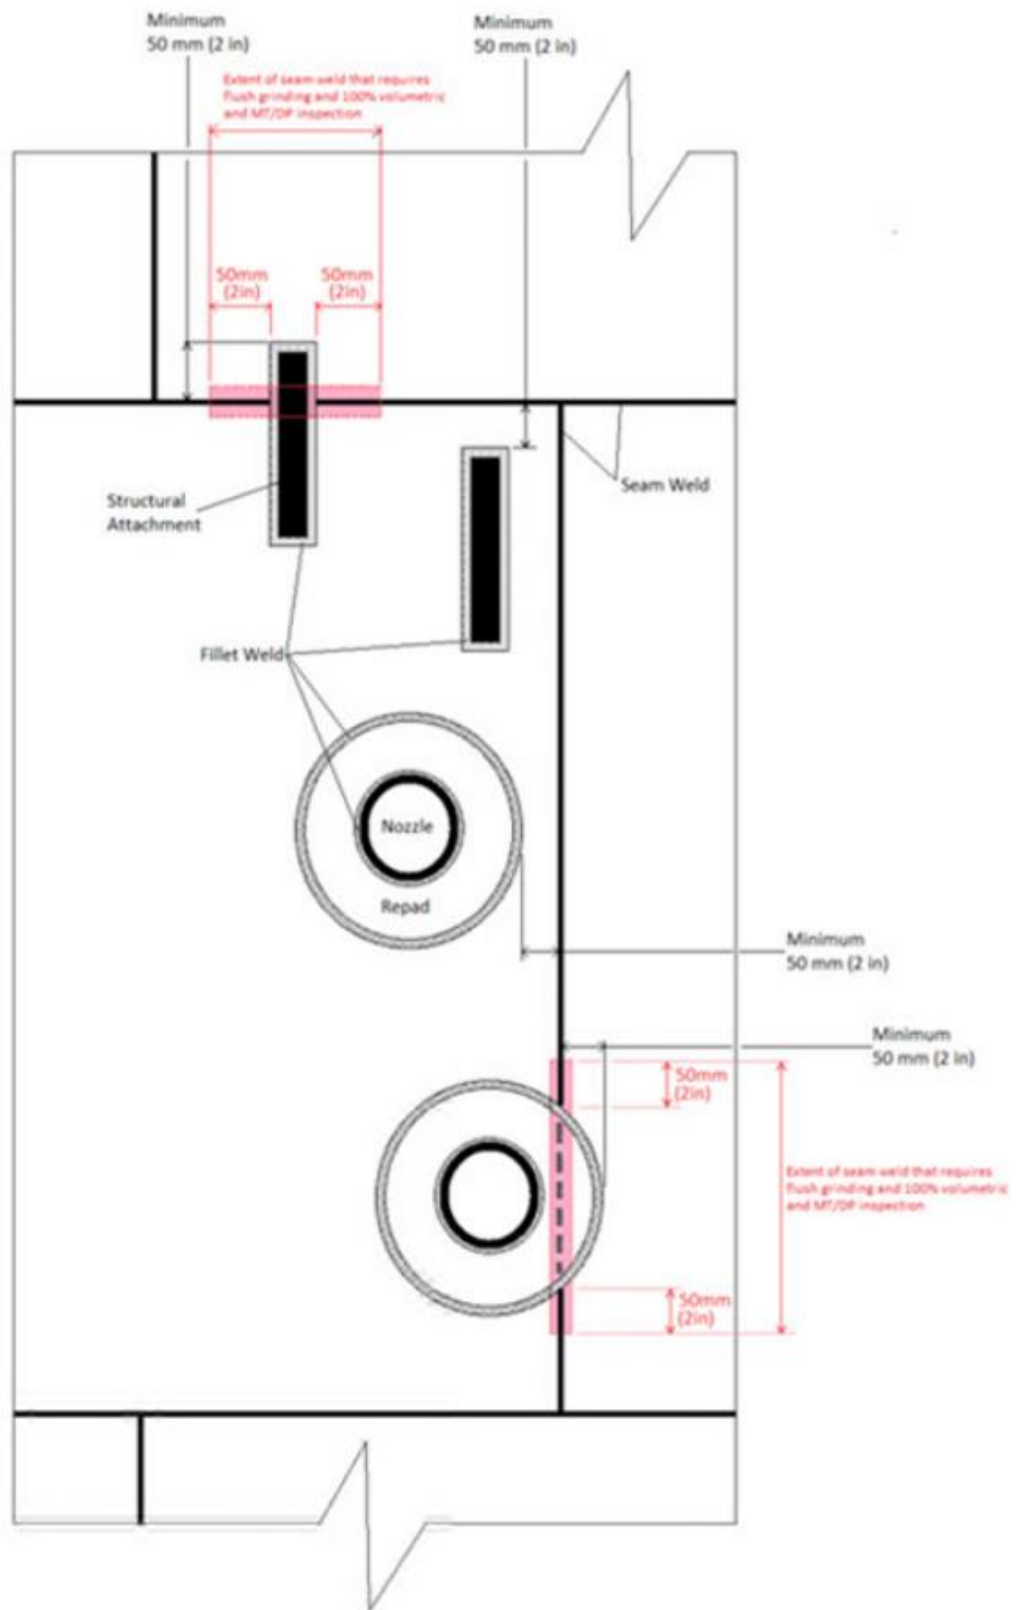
Weld Seams Clearance and Overlapping
